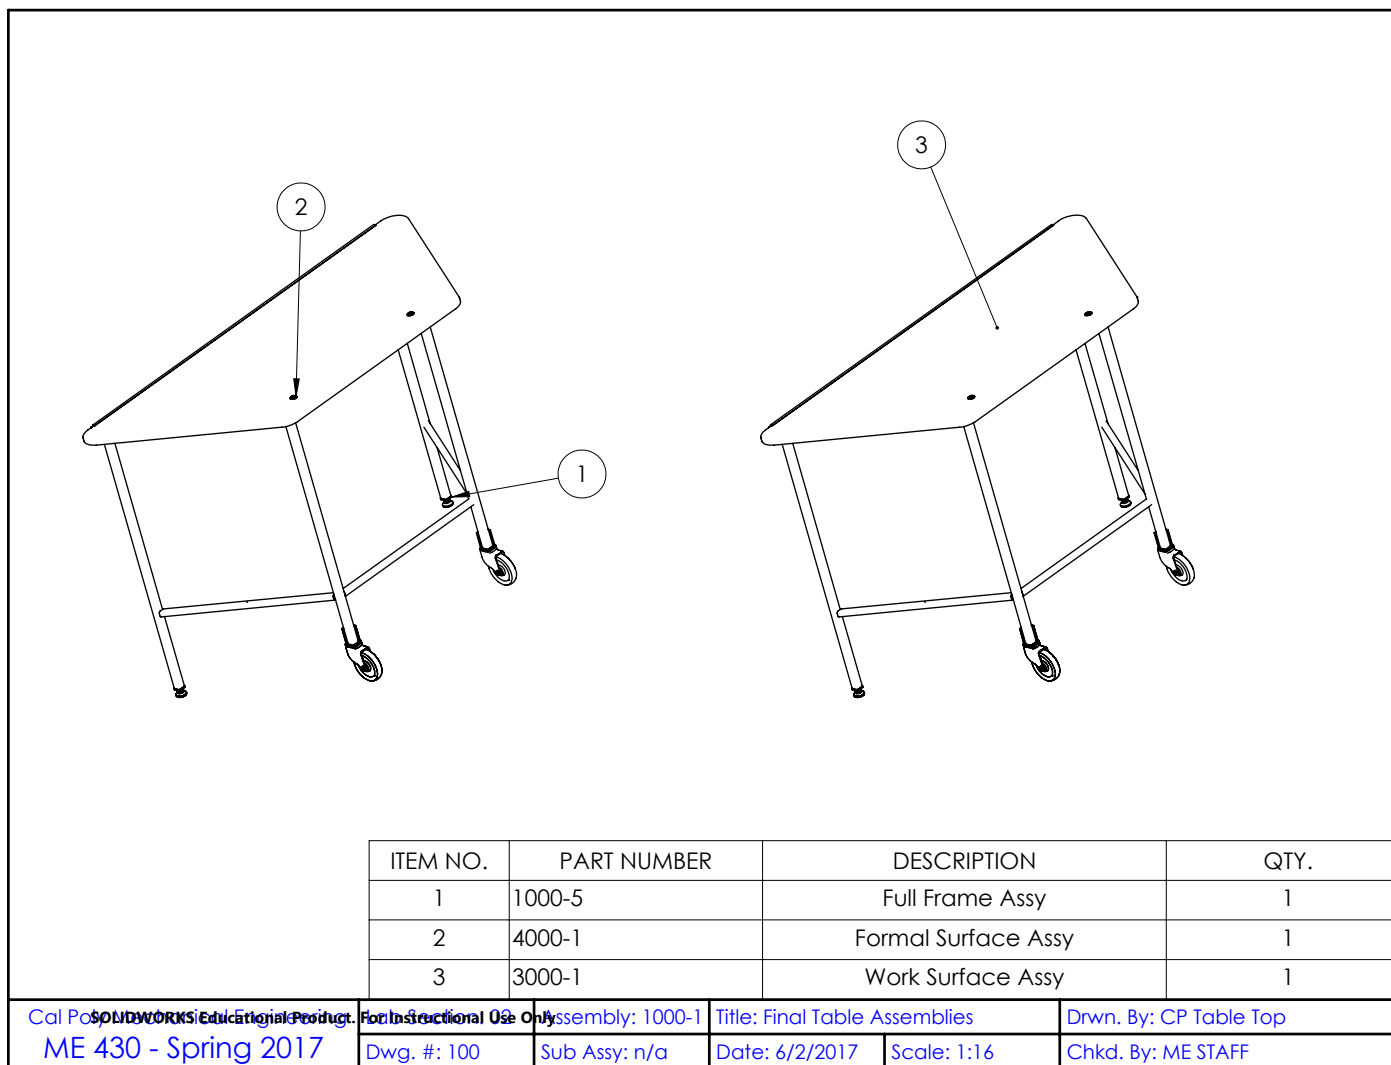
Drawing 100 - Top Level Assembly, Both Surfaces
